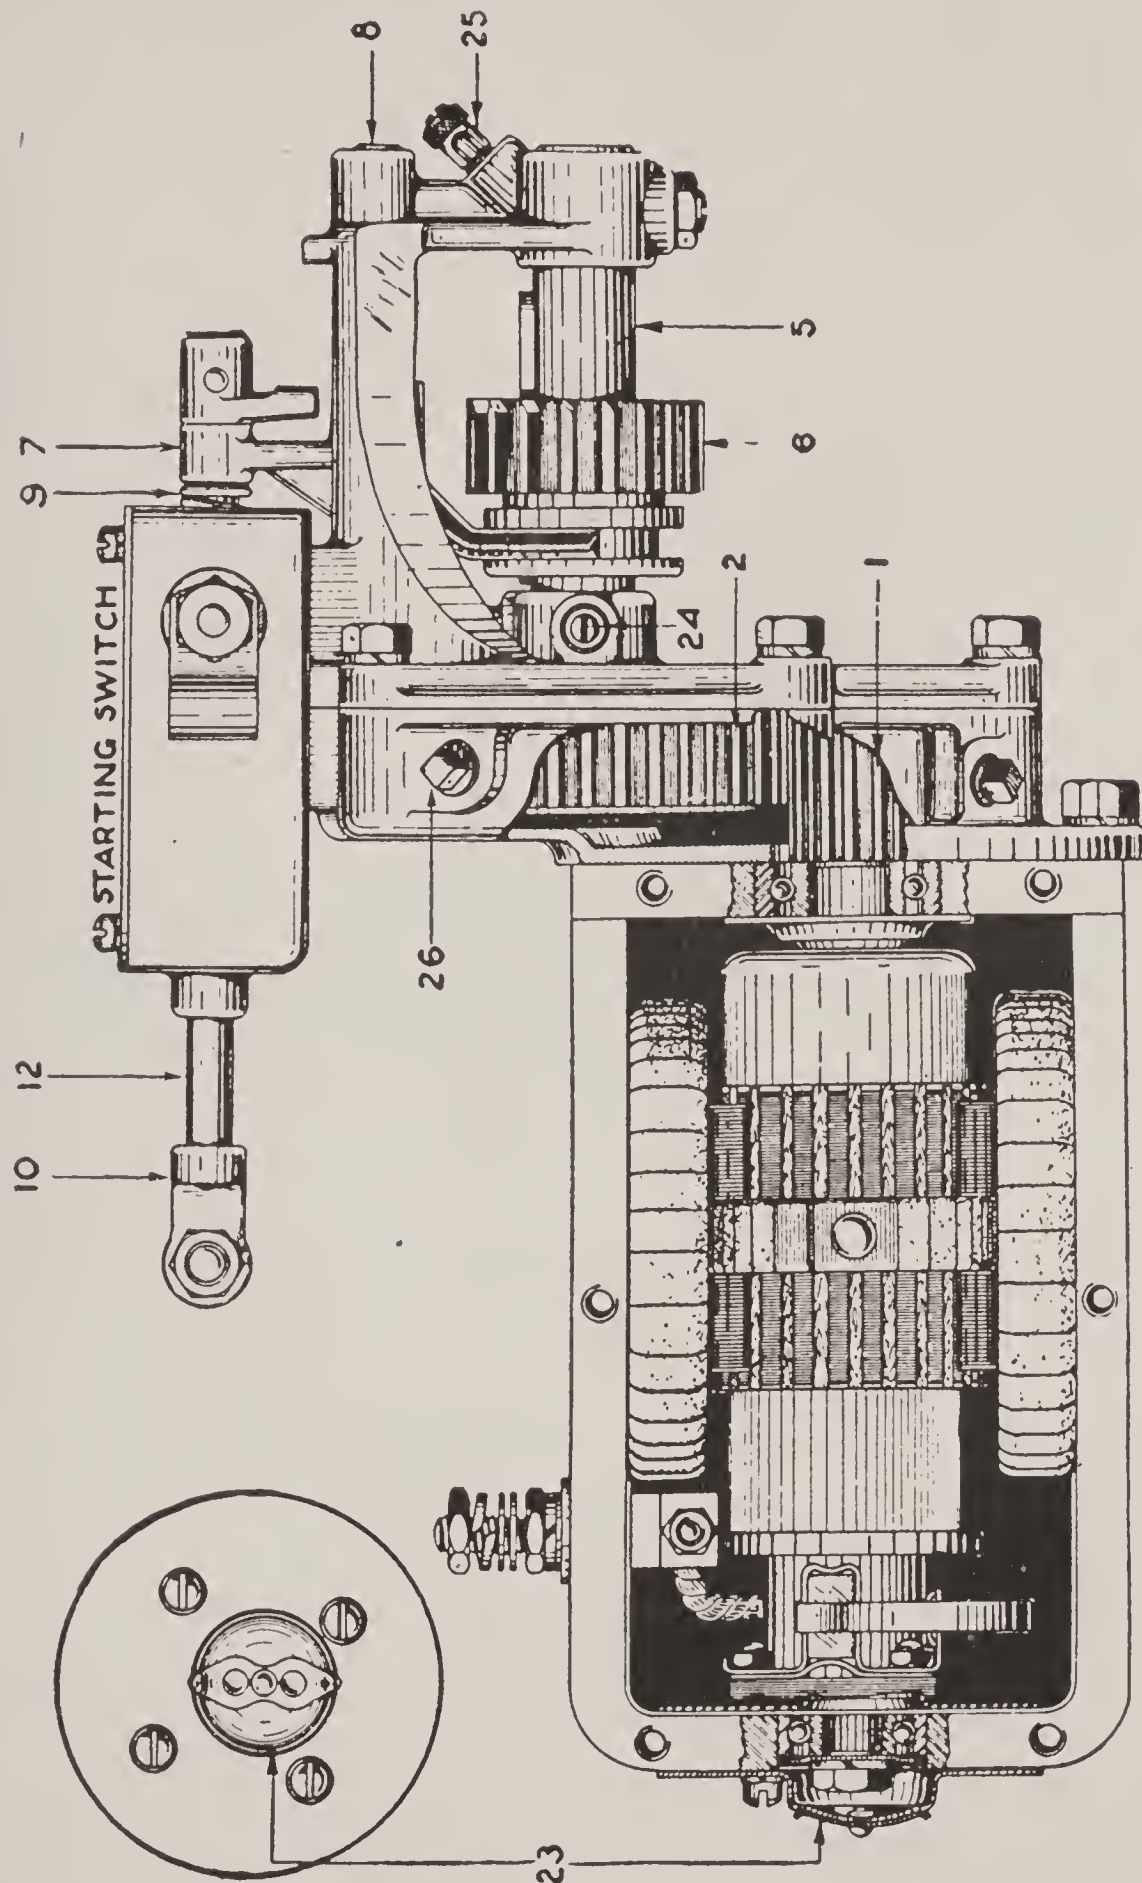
Gray & Davis Starting Motor with Reduction Gearing for Open Flywheel. 1—Motor Pinion; 2—Intermediate Gear; 5—Intermediate Shaft; 6—Sliding Pinion; 7—Shifter Fork; 8—Shifter Rod; 10—Switch Rod; 23, 24, and 25—Oilers; 26—Oil Plug
